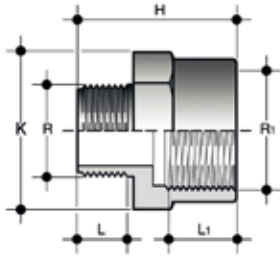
Fig. A Reducer with BSP threaded male end (R) and BSP threaded female end (R1 reduced) (fig. A)
